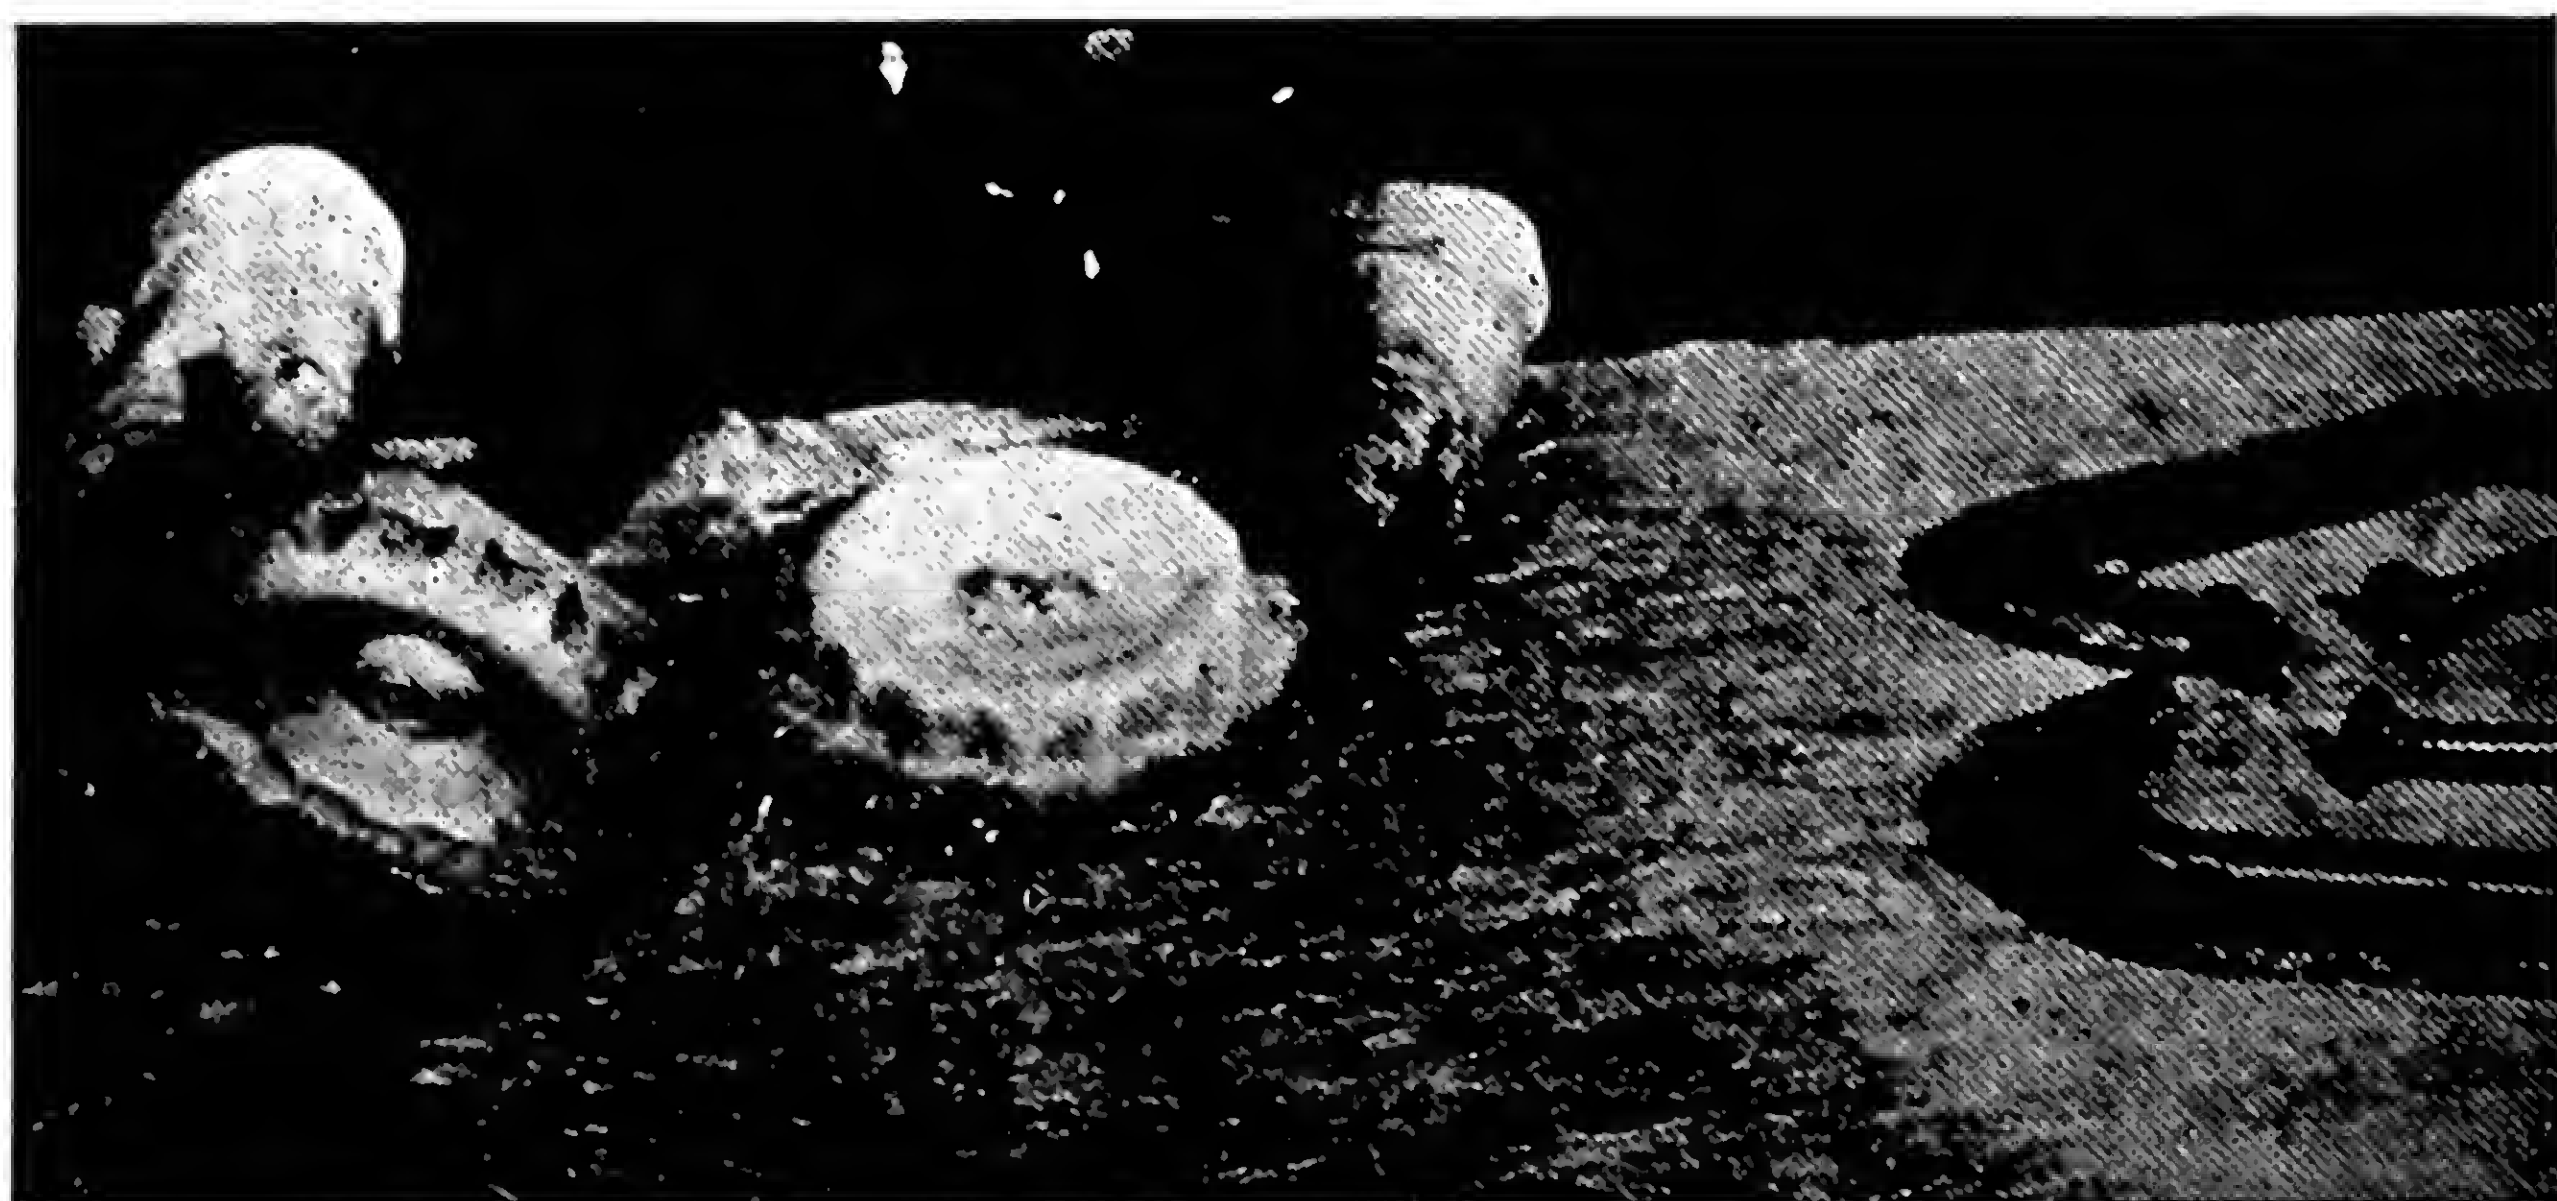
Female die removed from assembly. Note cured laminate yet in place on the male die or mold.
